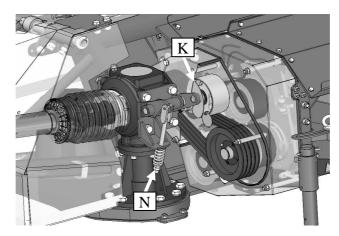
Adjusting the chain tension on the chain gear (view with guard removed) of the swath rollers (for: KT 261 W (H), KT 301 W (H))
